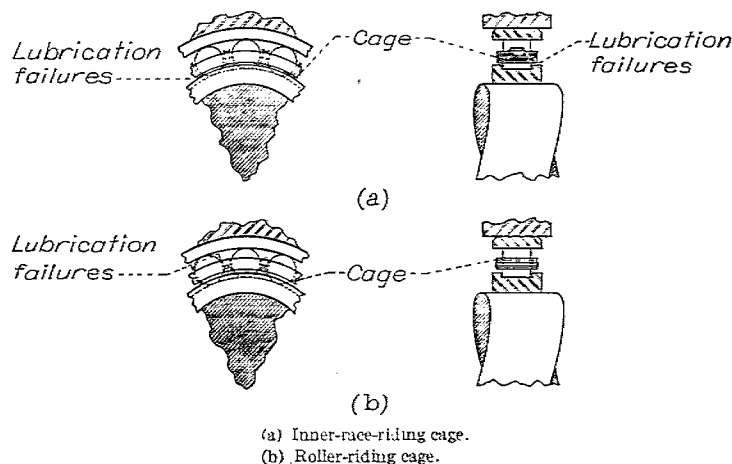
Location of lubrication failures at cage-locating surfaces of rolling-contact bearings.
